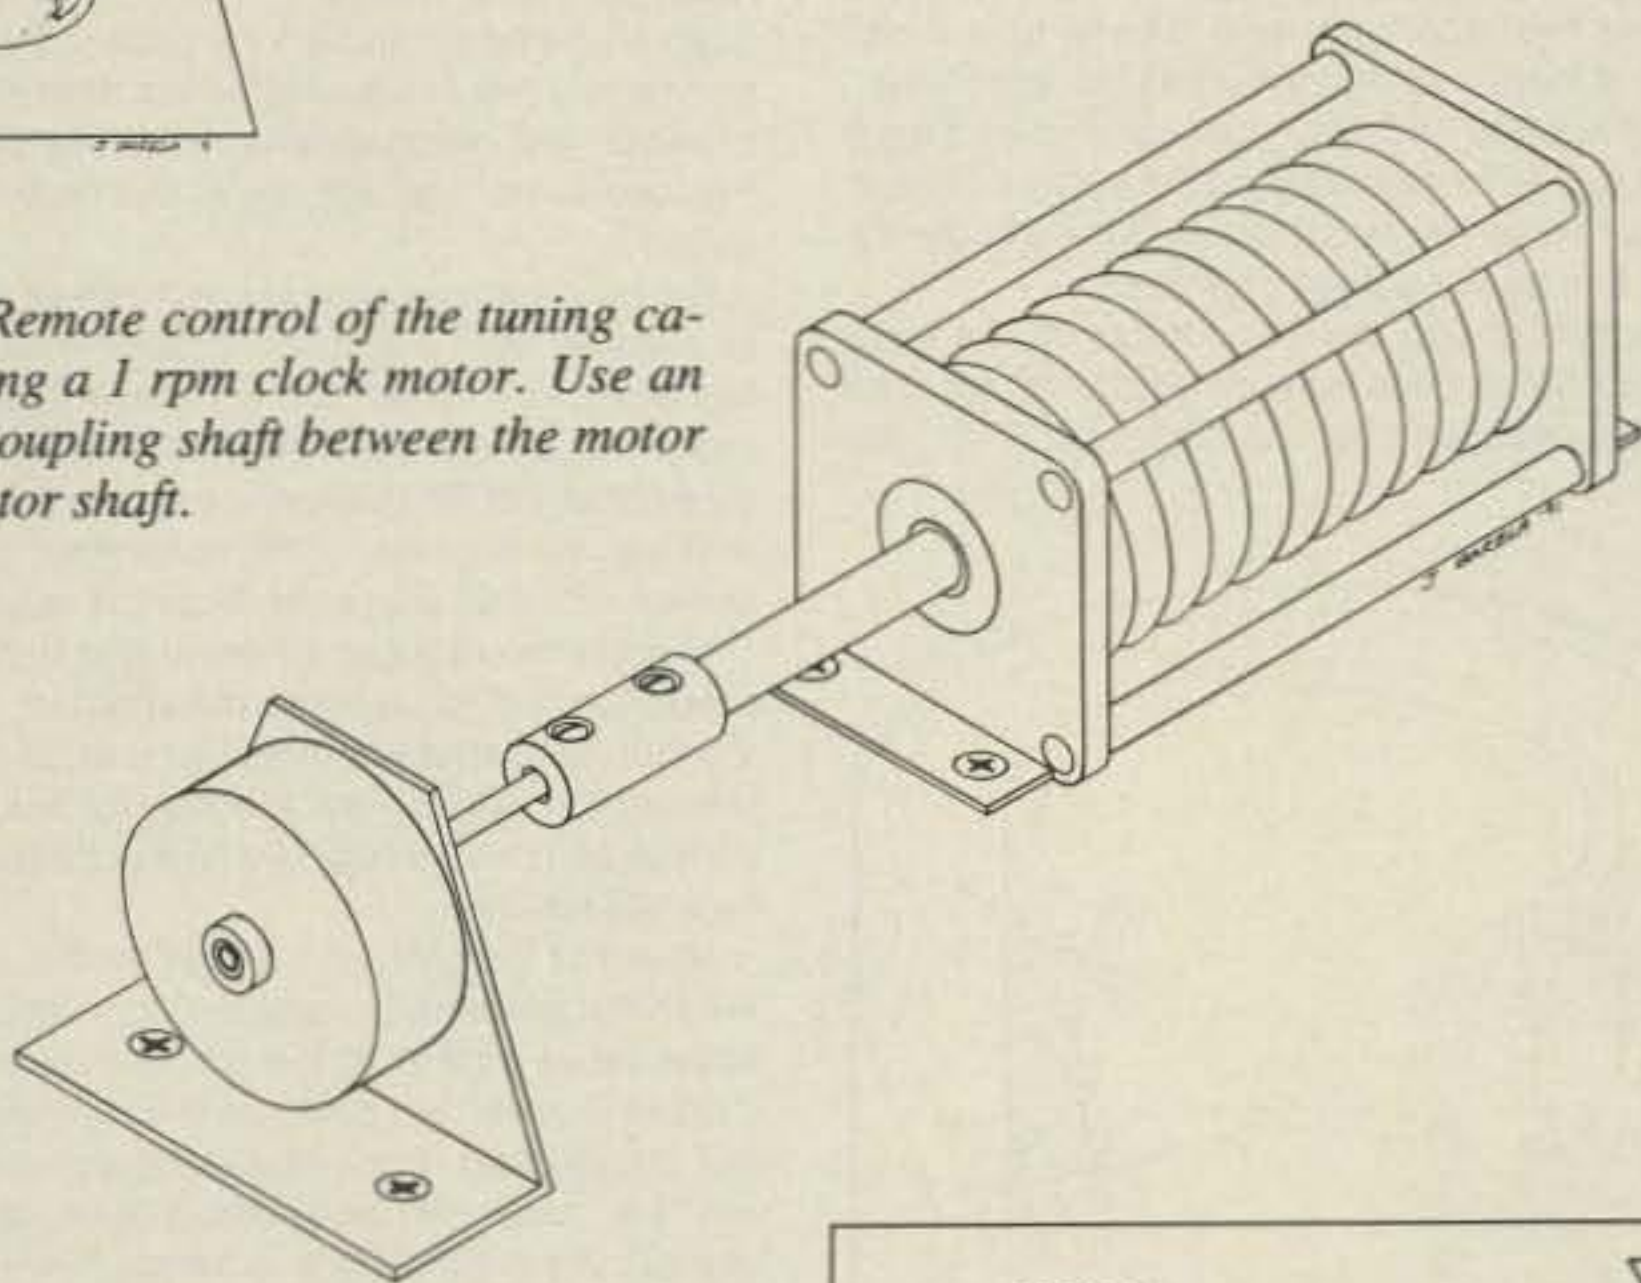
Remote control of the tuning capacitor using a 1 rpm clock motor. Use an insulated coupling shaft between the motor and capacitor shaft.
